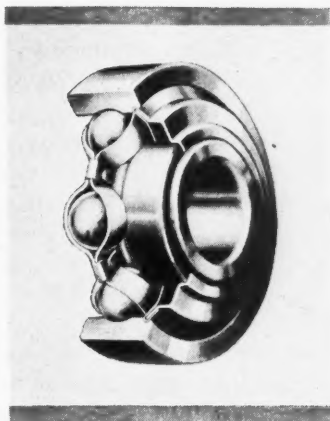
New Departure Ball Bearing with Built-in Seal that Effectively Retains the Lubricant and Prevents Dust from Entering
